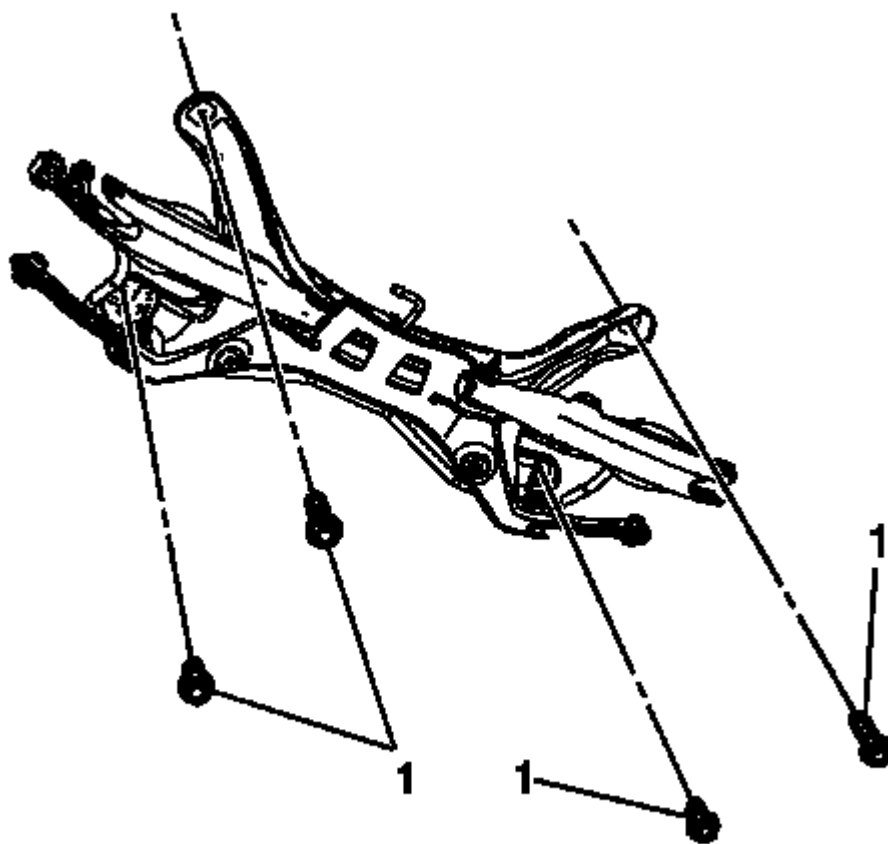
Identifying Support Assembly To Body Bolts (Sedan/Coupe)
